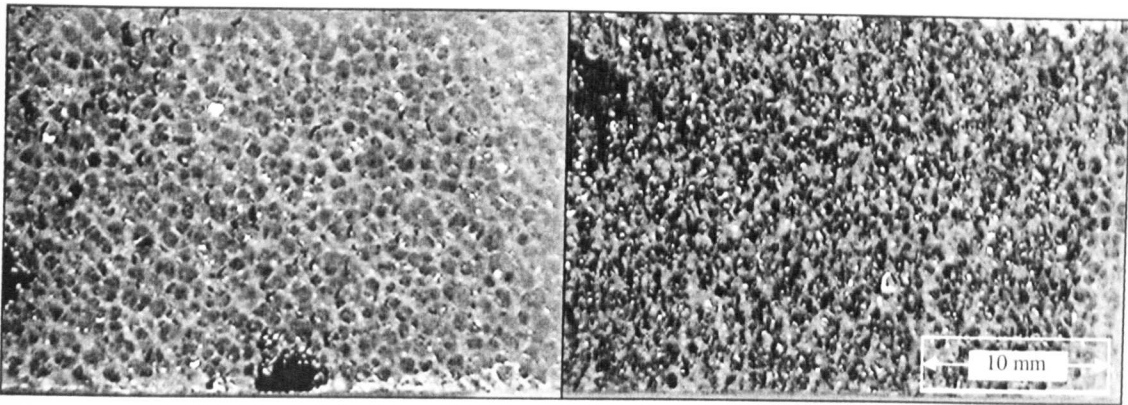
Fracture surfaces following an MTPB test on Structure N, (a) Foam core fracture surface, (b) Face-sheet fracture surface. The foam material is clearly visible on this surface.
